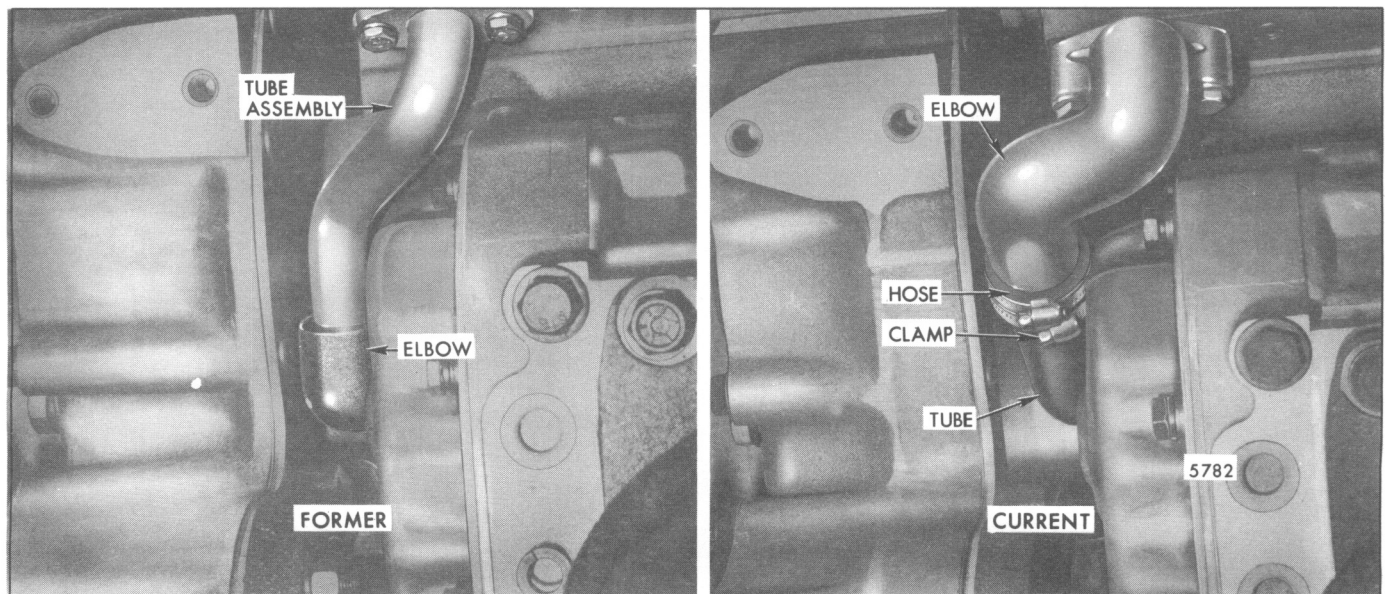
Cylinder Block to Cylinder Head Breather Systems for 6V-92 and 8V-92 Engines
